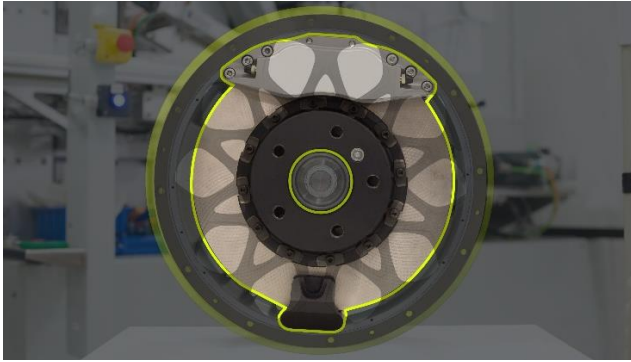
Overlaid picture of a mechanical brake integration into an in-wheel motor, indicating the tight integration space
